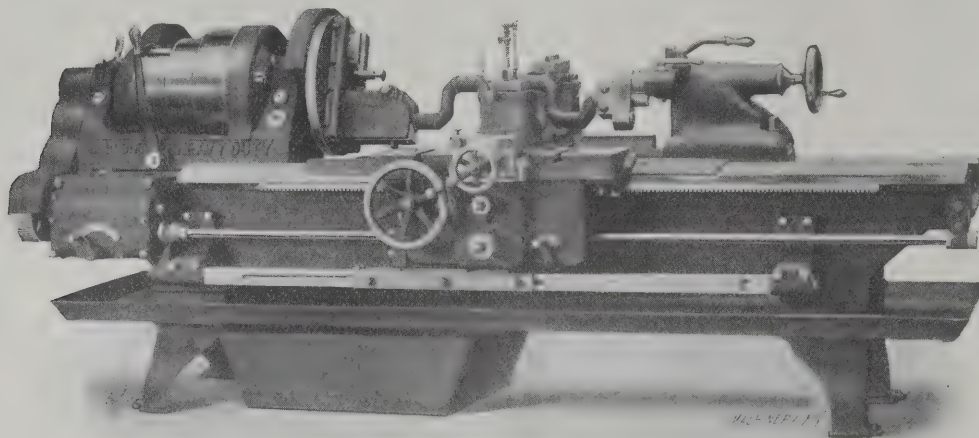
Le Blond Heavy-duty Lathe arranged for Crank-shaft Work
